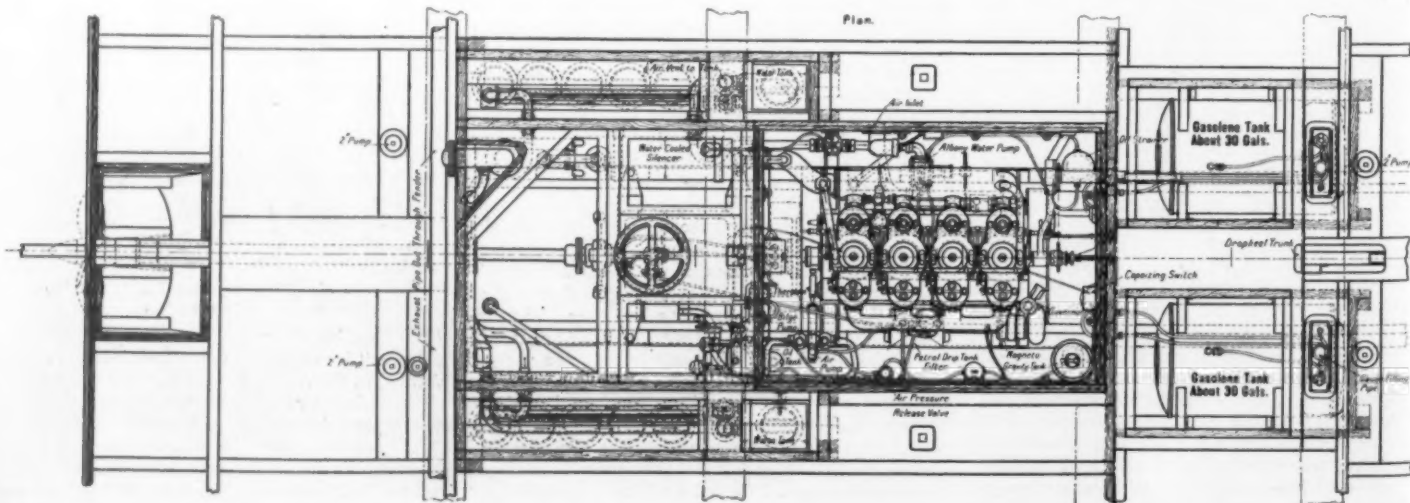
Plan View of the Motor Equipped Life Boat.
